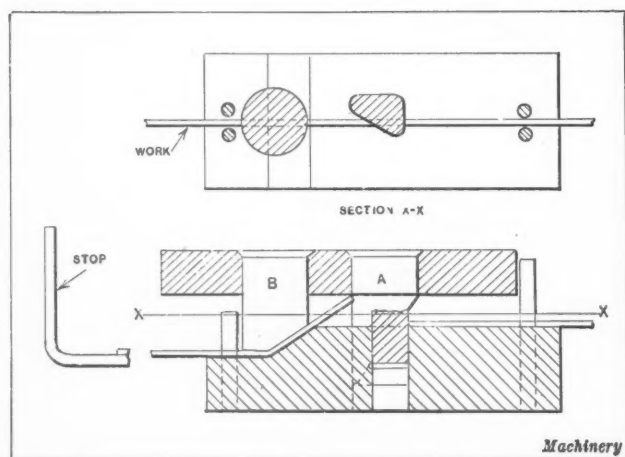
Die employed for cutting the Wire from the Stock and bending One End
